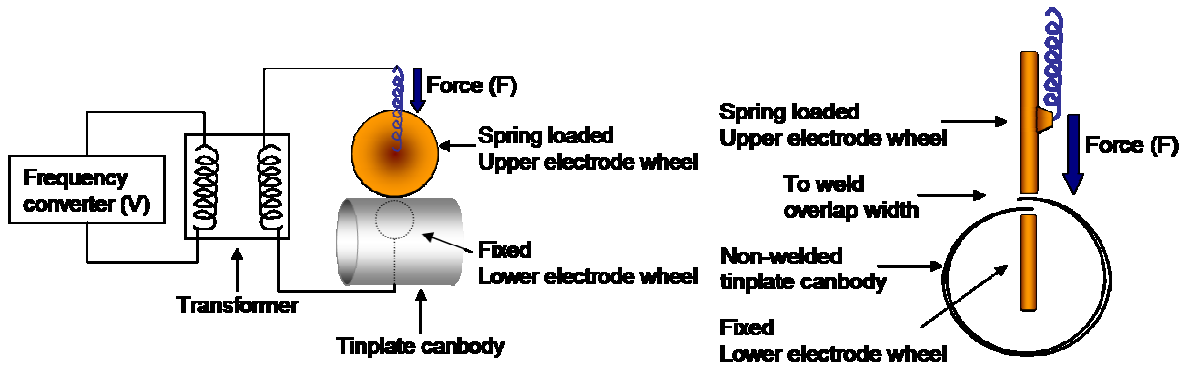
Schematic of the HSRW process. The left-hand picture shows a side view of the welding process and the right-hand picture a front view. In both pictures the spring-loaded upper electrode wheel and smaller but fixed lower electrode wheel supply the current (AC) to the can body overlap width.
